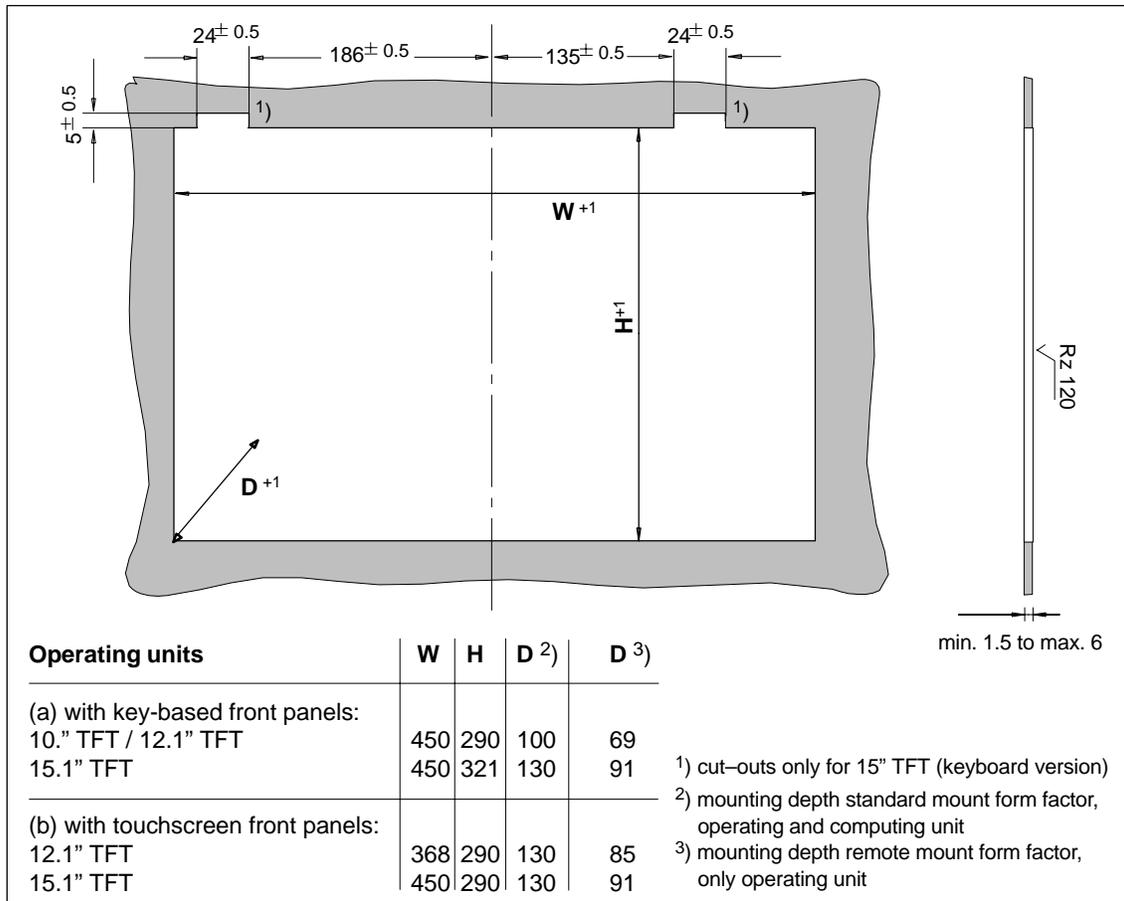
Mounting cut-out for standard mounting of Panel PC 670 (width x height x depth in mm)
